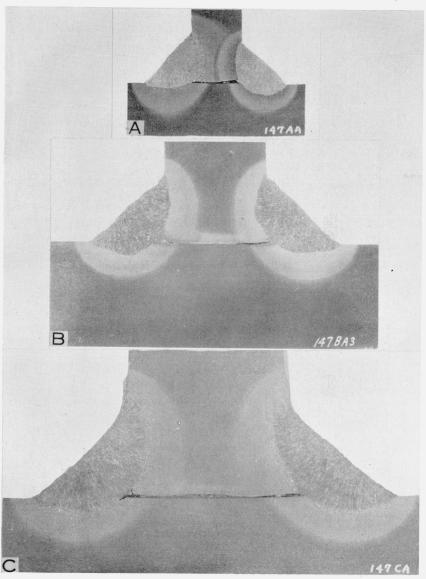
Typical macrostructures of the welded specimens. A, ¼-in. plate; B, ½-in. plate; C, ¾-in. plate.
